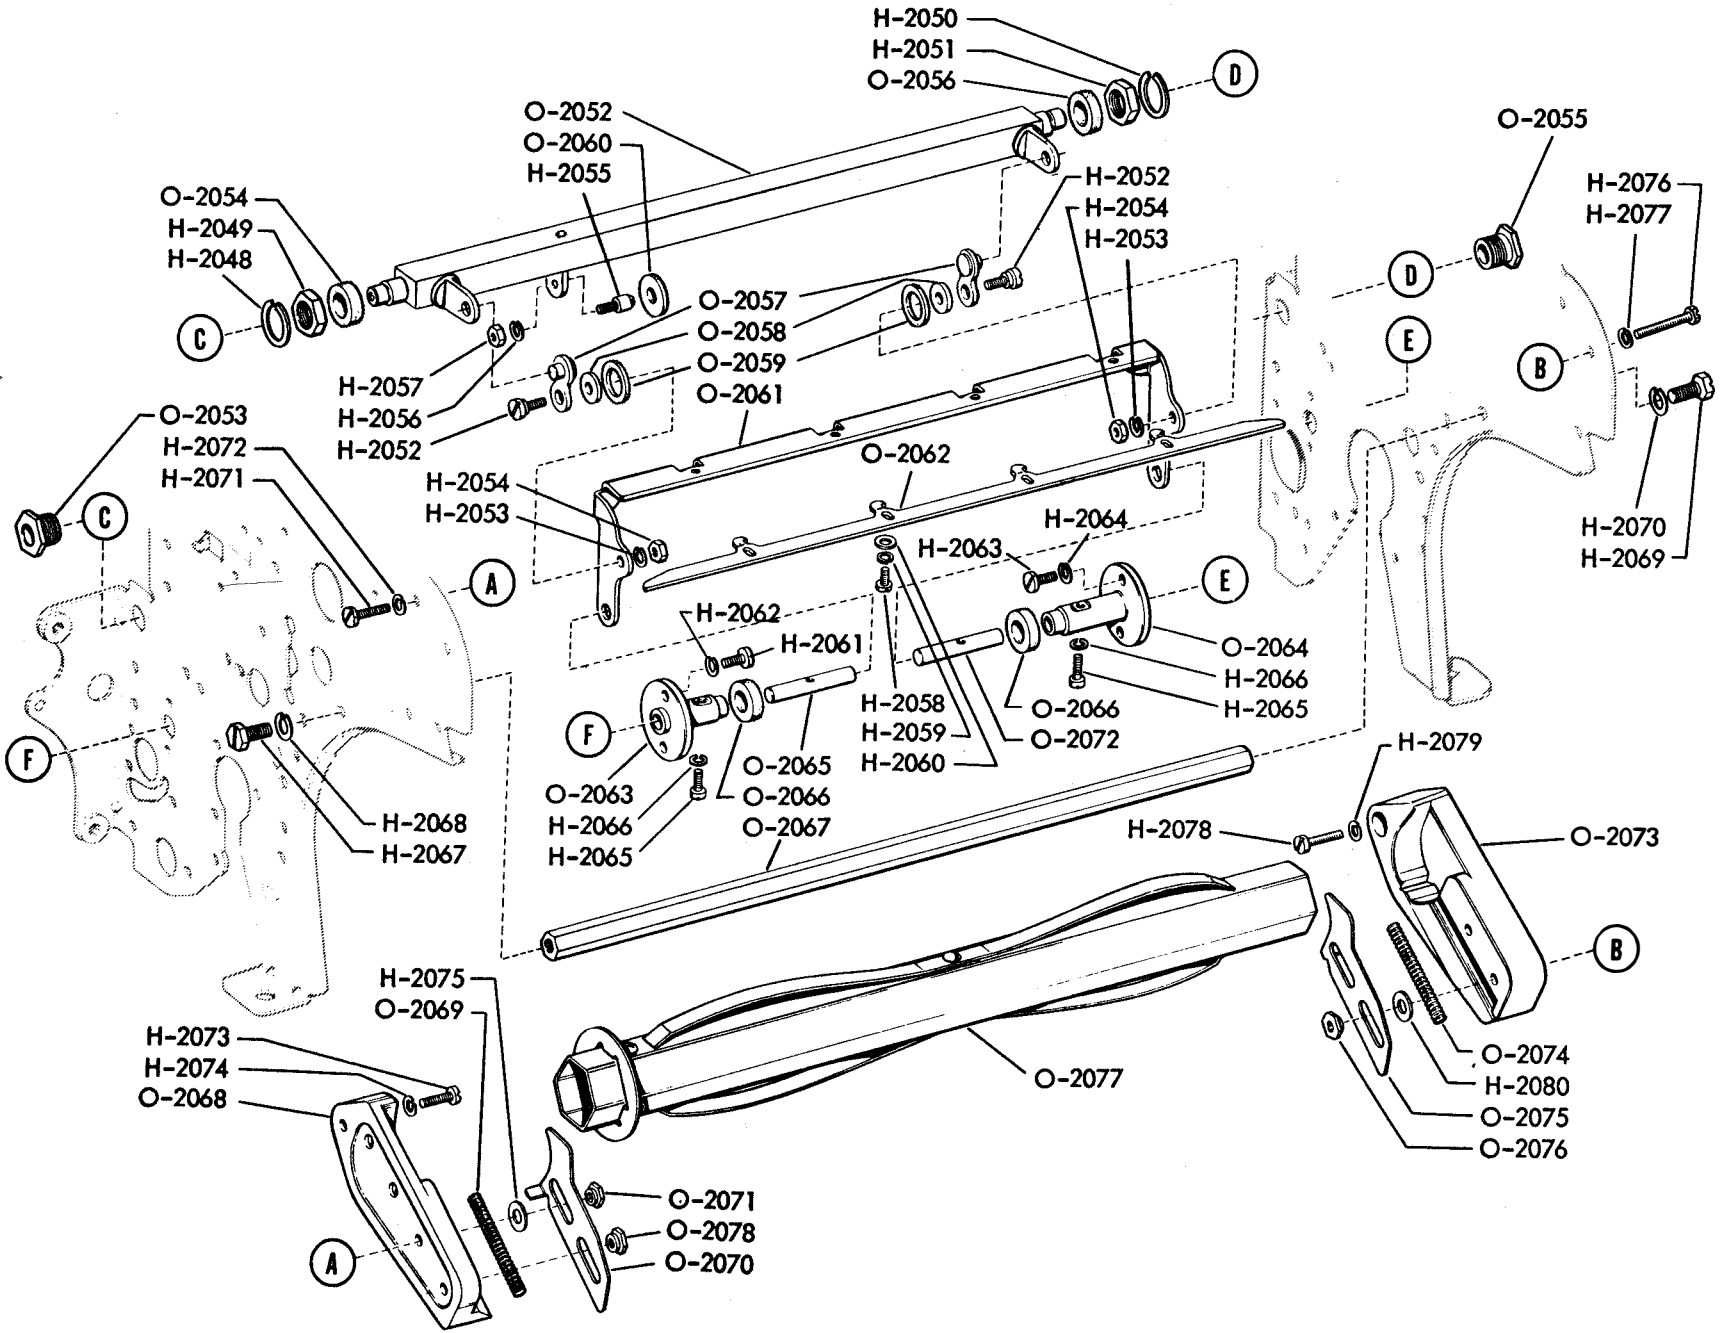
Automatic Typewriter, Paper Spindle and Reset Bail Mechanism
